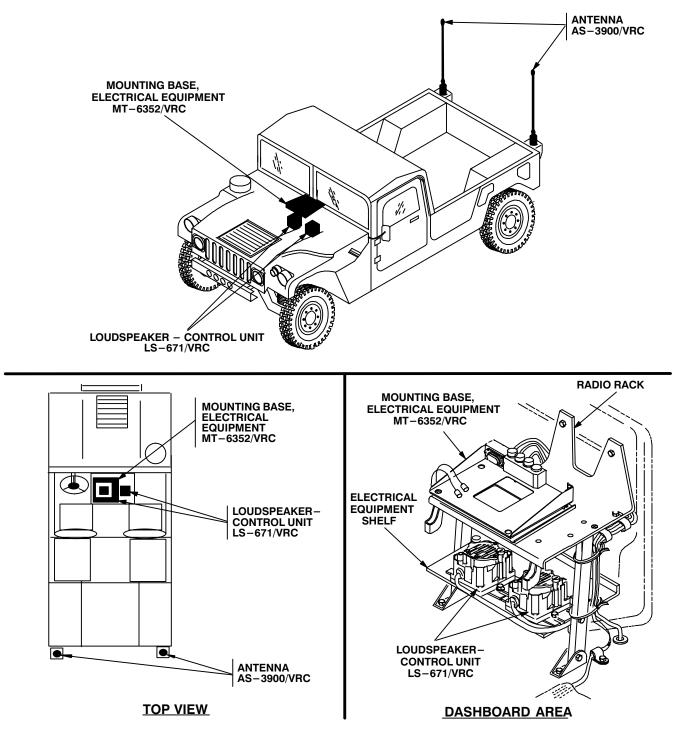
(1). MK and Radio Installation: MK Equipment Locations
